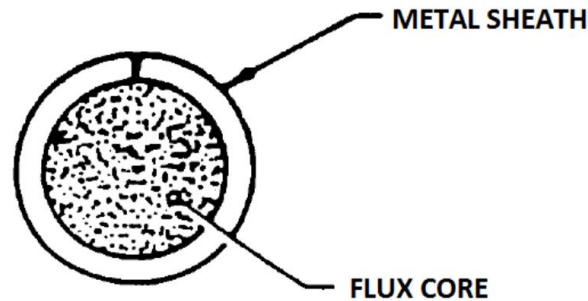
CROSS SECTION OF A FLUX-CORED ARC WELDING WIRE
